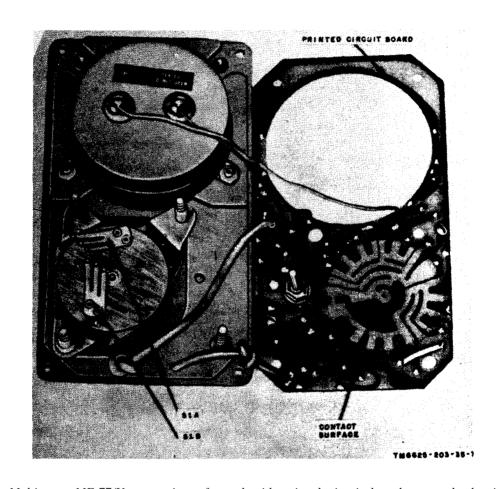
Multimeter ME-77/U, rear view of panel with printed circuit board removed, showing selector switch contacts and printed circuit.
